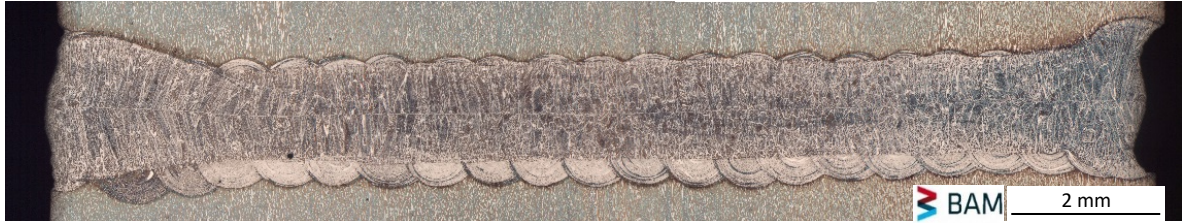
Microsection of weld seam with LMD-tacking
